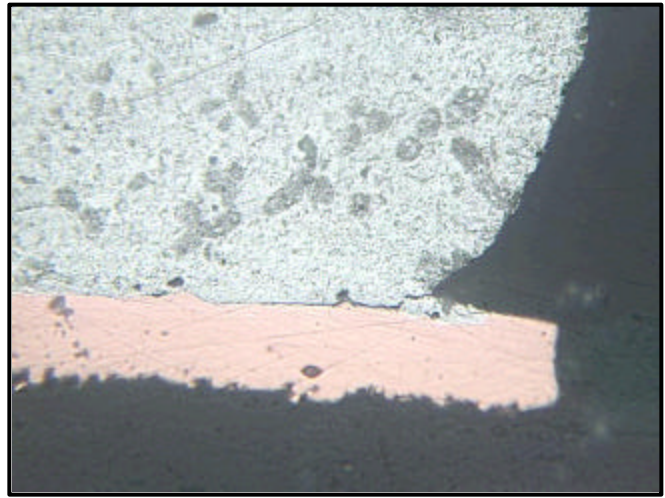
Cross section of the specimen subjected to 3-point bend test showing the failure at the BGA/PCB interface near the intermetallic layer.
